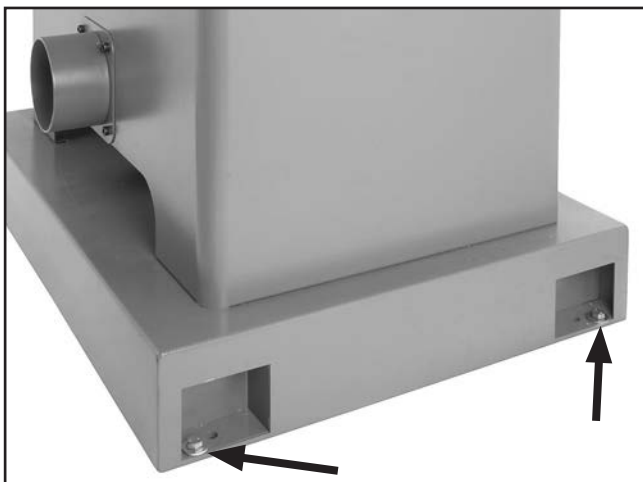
Example of where machine is bolted to the pallet (shows only one side; machine is also bolted on other side).
